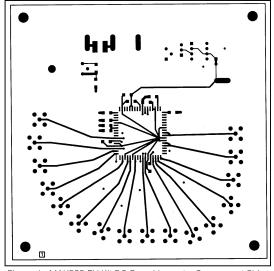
MAX555 EV Kit PC Board Layout—Component Side
